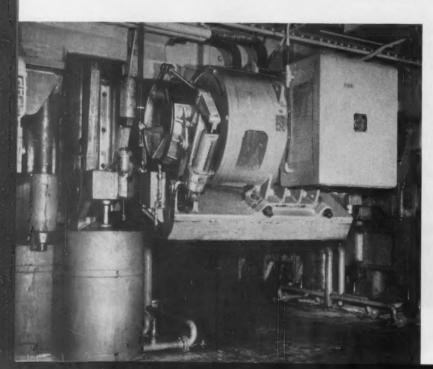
A view of a forced-torque 500-H.P. drive applied directly to the crank-arm of a press.
